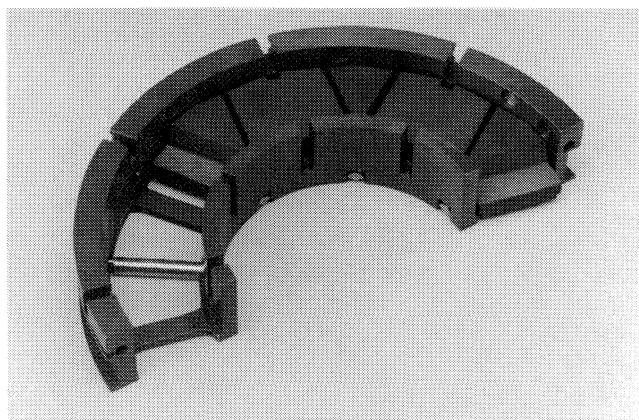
Controlled Inlet Thrust Retainer Showing Assembly of Lower Link Pin and Links.
